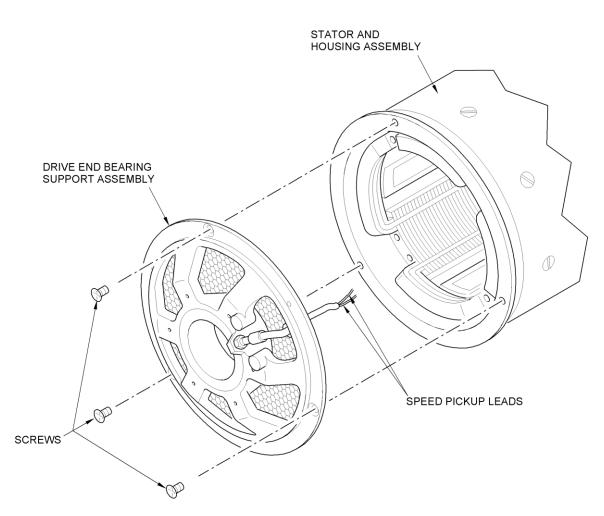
Installing Drive End Bearing Support Assembly (Pre-Load)
